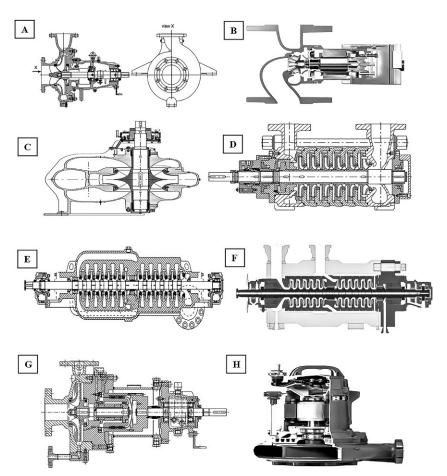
(A) Single-stage volute pump, (B) circulating pump for central heating installation, (C) double-entry vertical pump, (D) multistage segmental pump with suction impeller and balance disc, (E) multistage, axial-split pipeline pump with double volutes, (F) highpressure seawater injection pump, (G) sealless process pump, and (H) submersible sewage pump (Gülich, 2008).
